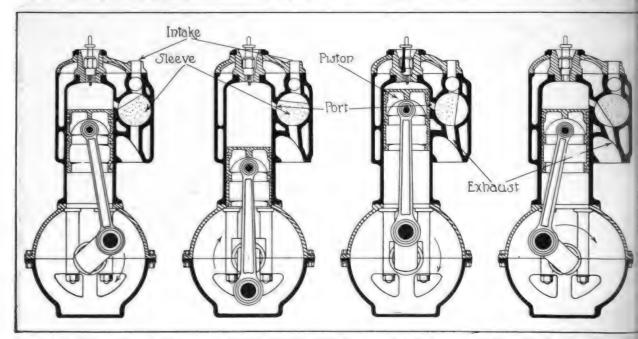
Presenting Working Details of the Darracq-Henrold Rotating Sleeve Engine, Seen Mounted in the Darrace Cars at the Salon.
